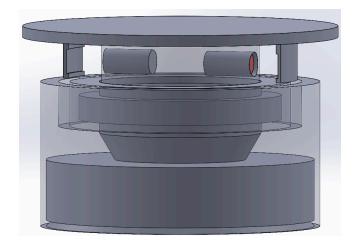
Preliminary design incorporating magnet shields, which would require them to be nested inside a ring on the bottom half of the lock.
